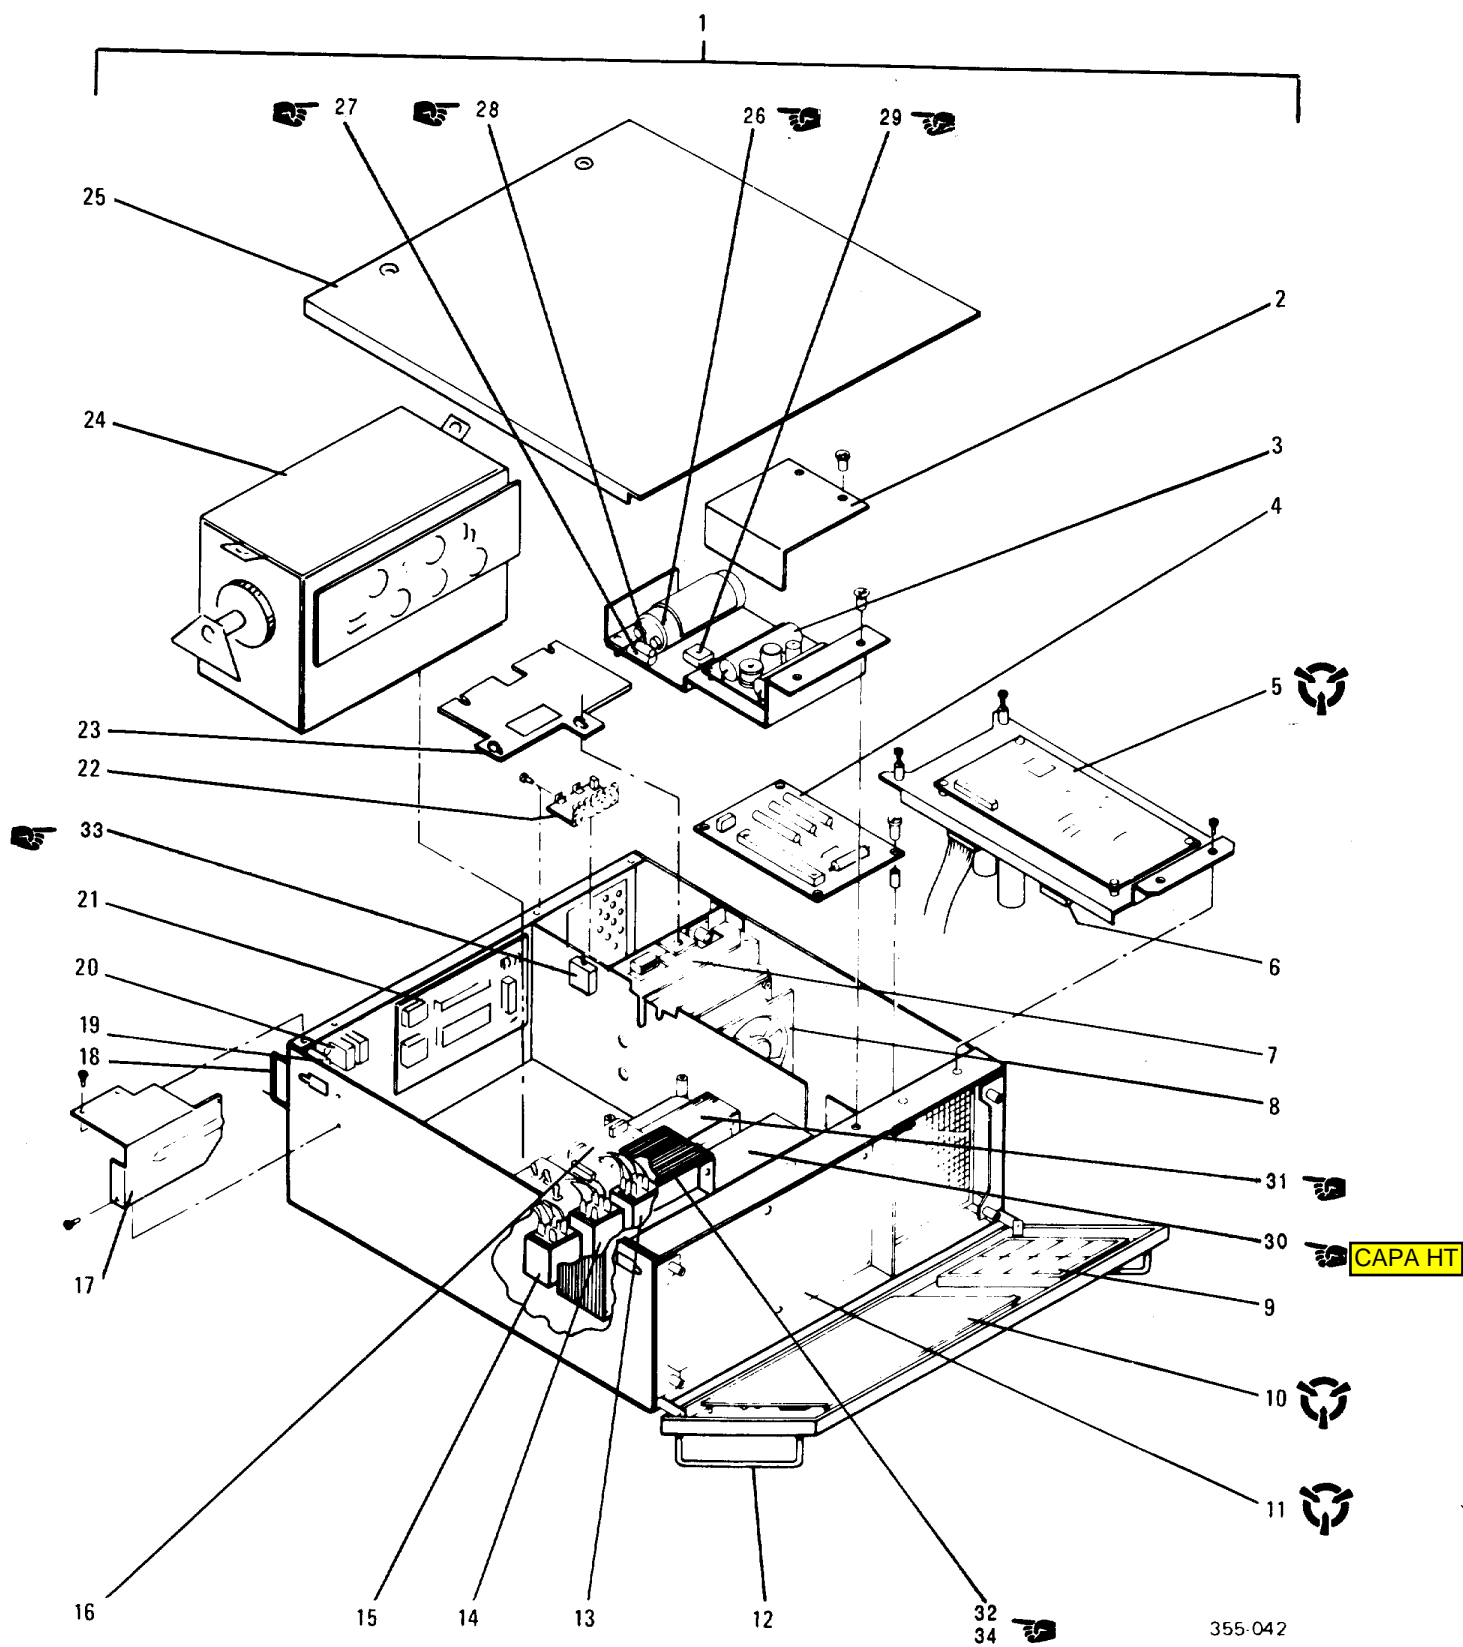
500 Watt LPA, AM-7223/URC, Exploded View
